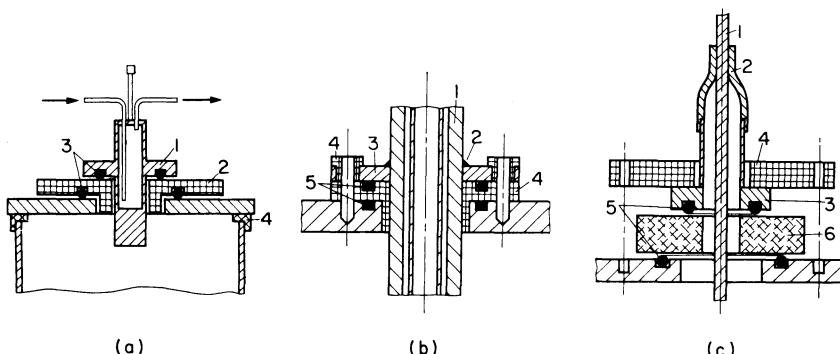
Double O-ring (groove) seals for electric lead-throughs: (a) vertical lead-through, sealed by atmospheric pressure. After Stroud¹²⁰⁸ (*Courtesy of Pergamon Press*) ; (b) bolted O-ring seal, (1) electrode; (2) brazed joint; (3) flange; (4) Teflon insulator; (5) O-rings (after Dickinson²⁷⁹); (c) flexible seal. After Hoch⁵⁶⁹ (*Courtesy of The American Institute of Physics*)
